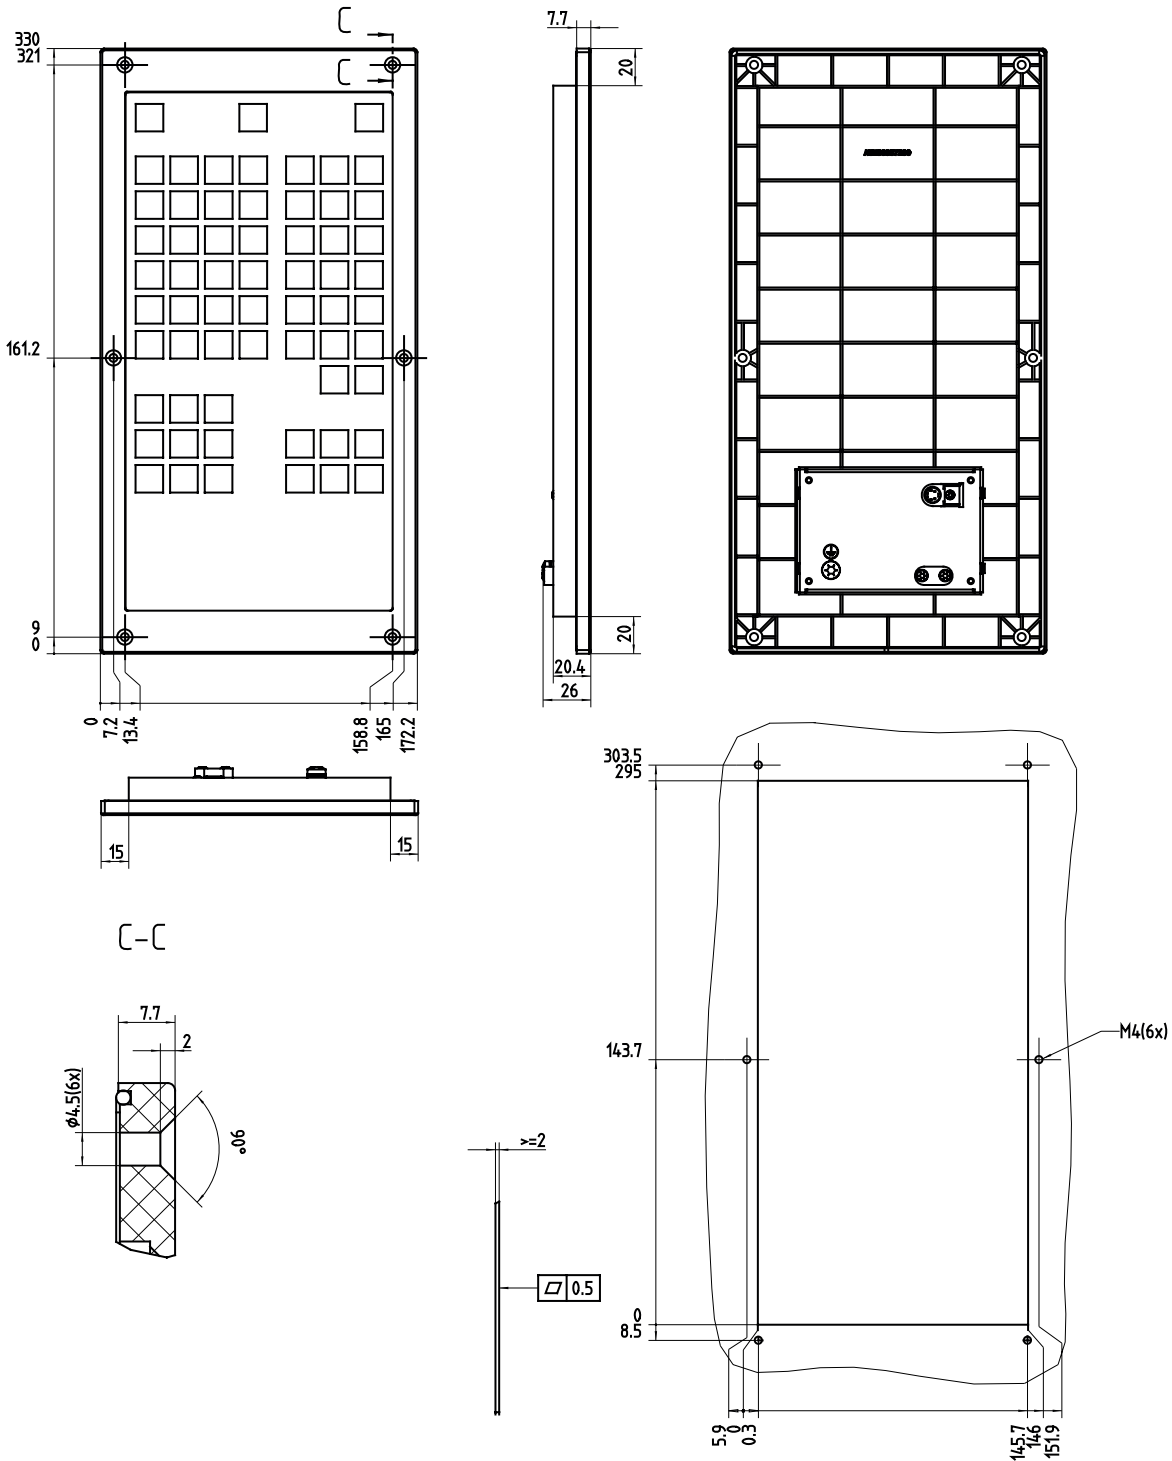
Dimensional drawing and hole drilling template of the NC full keyboard (installed next to the PCU)
